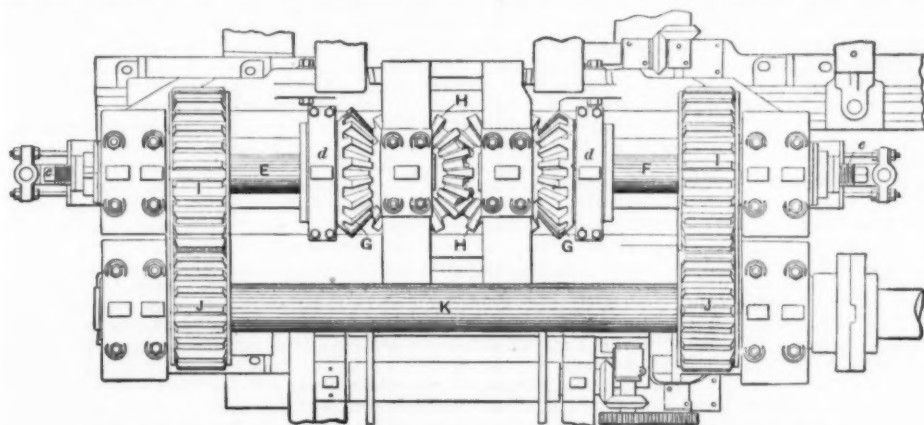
PLAN VIEW OF THE MILL, SHOWING GEARING FOR THE VERTICAL ROLLS.
